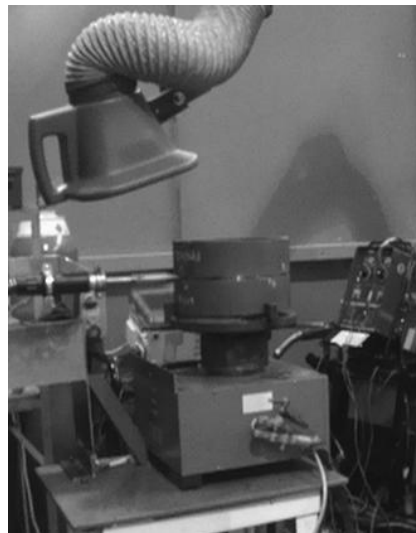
View of the rig used for pipe welding using a rotator machine.
